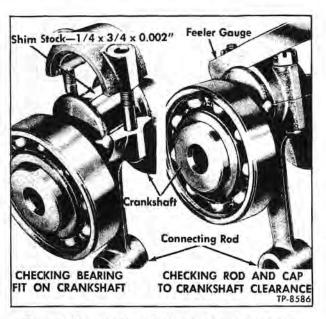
Checking Fit of Connecting Rod on Crankshaft
